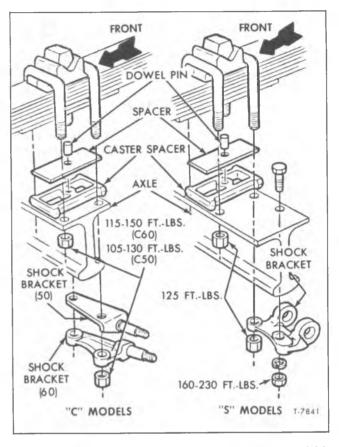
Front Spring Center Mounting ("C" and "S" Models)
